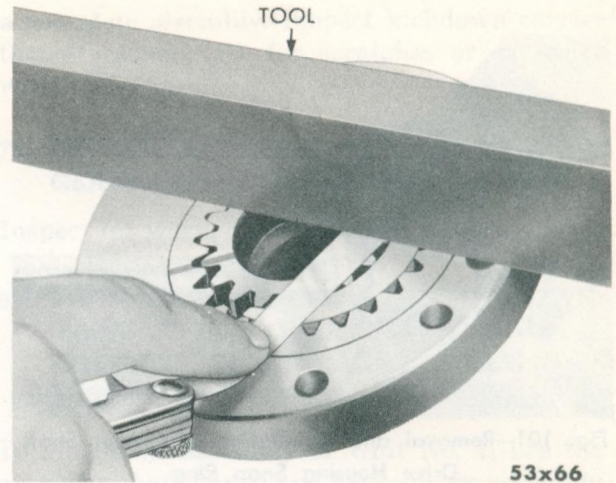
Checking Clearance between Rear Pump Body and Gears
